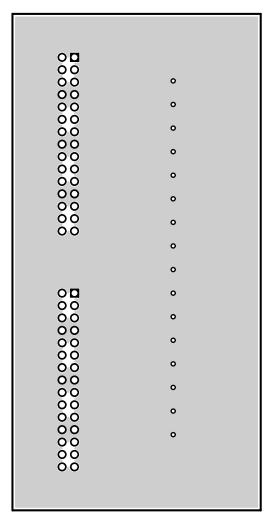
RGBLEDEVM-249 Bottom Layer Routing
